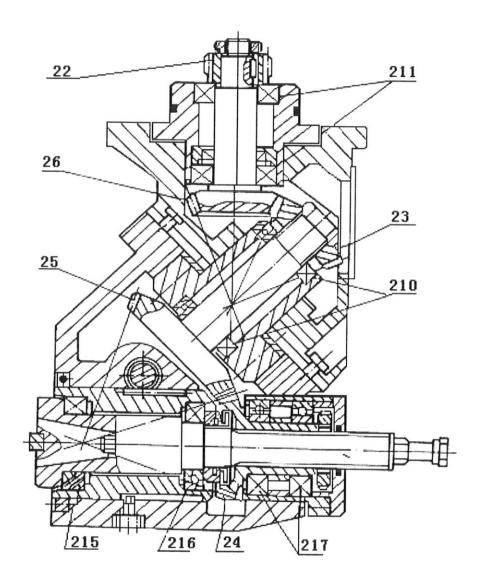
Driving system of milling head of 45° Universal rotary-head of Series X6230/3 & X6230/5
